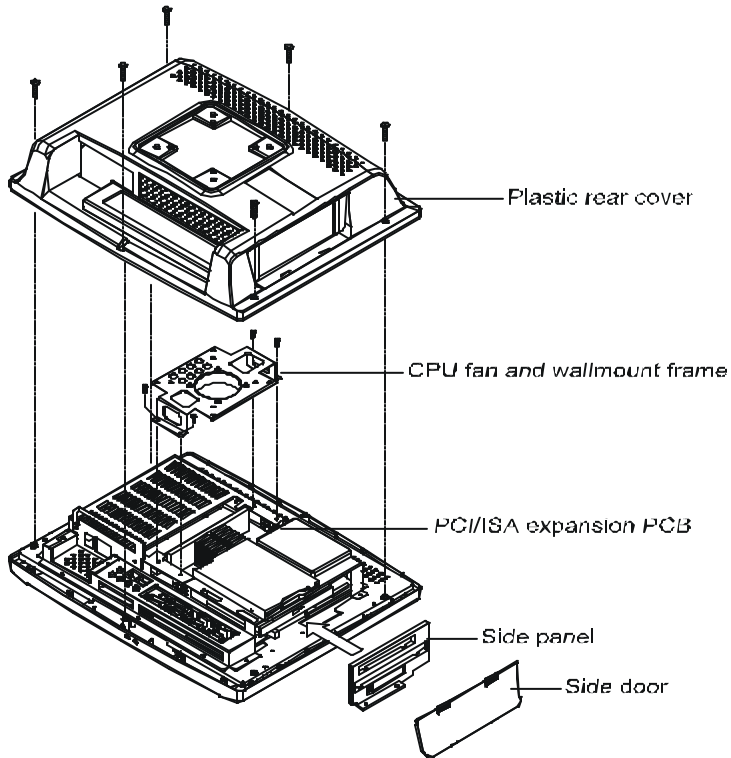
Disassembling the plastic rear cover of the POC-174
